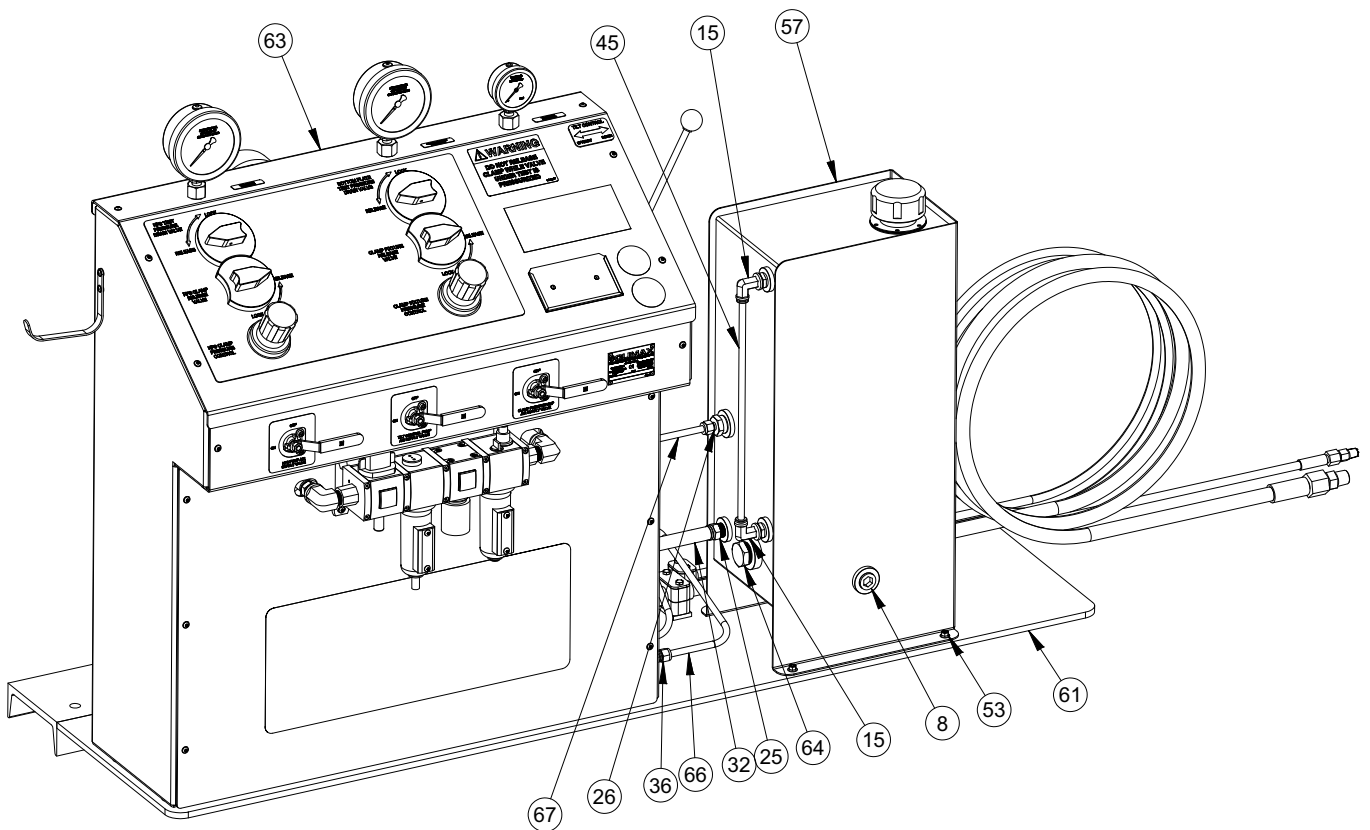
UFV-12-100T CONSOLE FRONT ASSEMBLY (P/N 88847)
